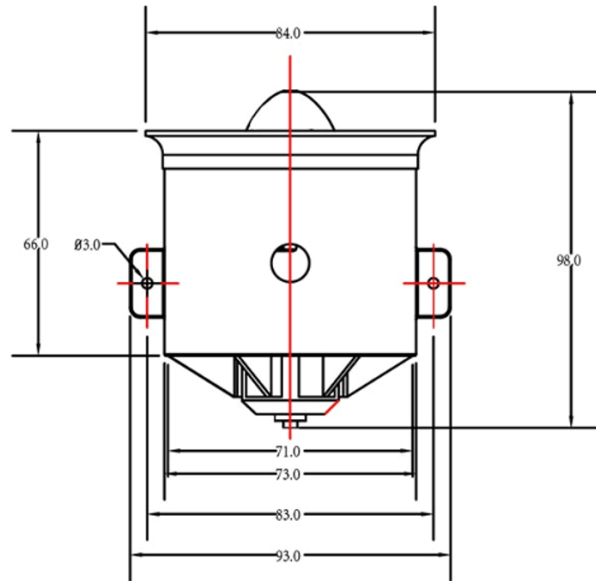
CAD drawing of the FMS EDF 70-mm ducted fan model
